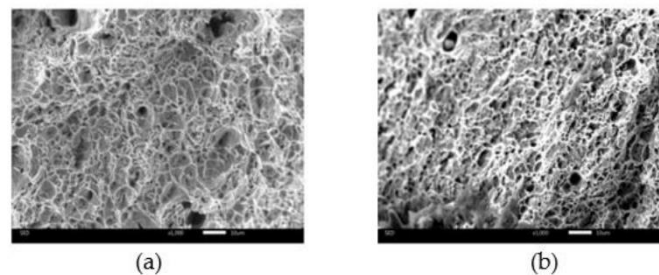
The microscopic photograph of fracture surface of S235JR steel specimens: (a) MP; and (b) SSII.
